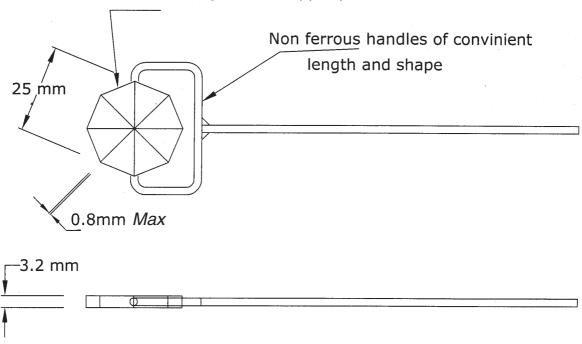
Pie Gauge (Magnetic Field Indicator)
